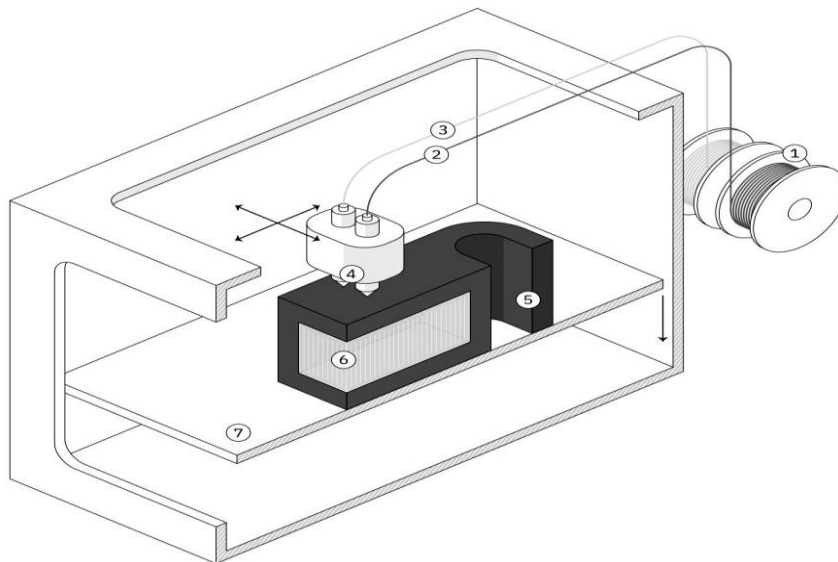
A typical FDM 3D printer: 1 – filament spools; 2 – main filament; 3 – support filament; 4 – extrusion head; 5 – printed part; 6 – support structure; 7 – build platform (<https://best3dprinter.org>).
